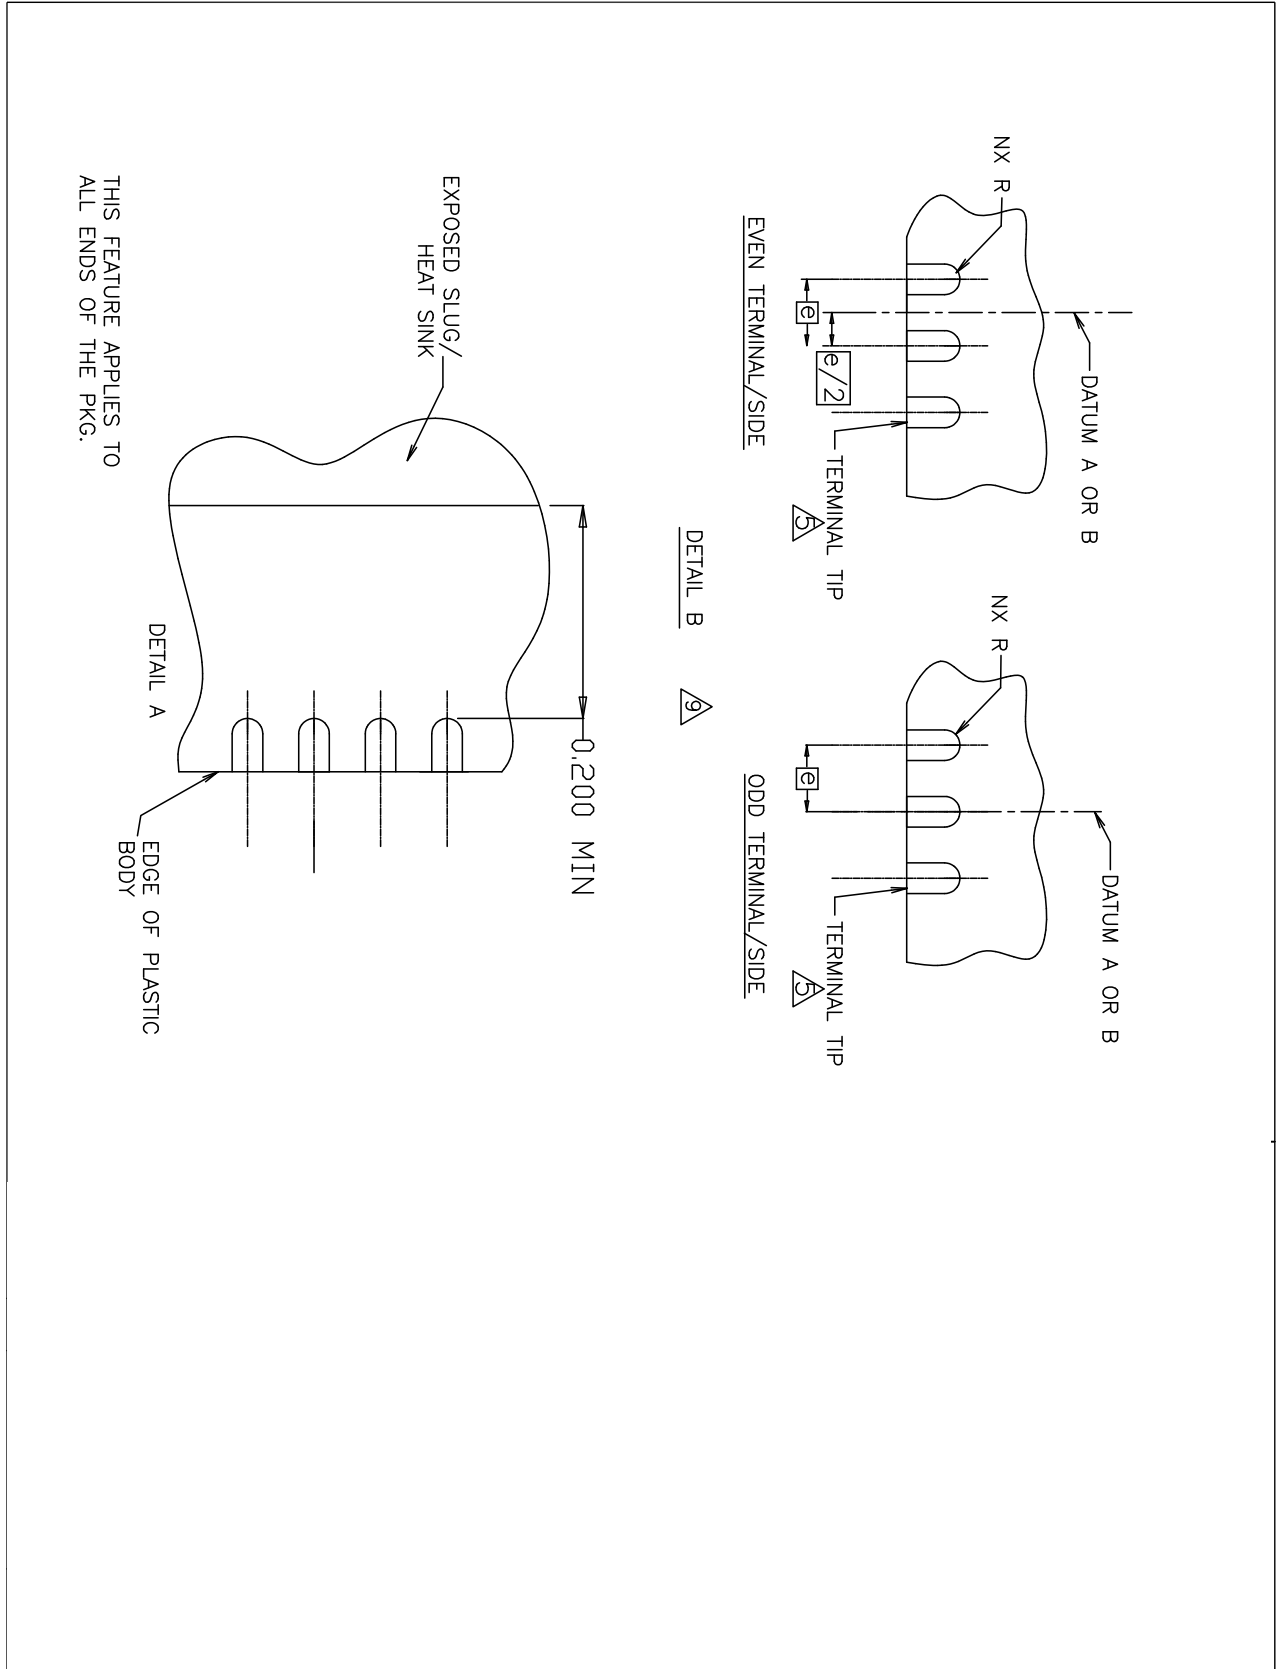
72-Pin QFN Package Dimensions (b) (in Millimeters)
